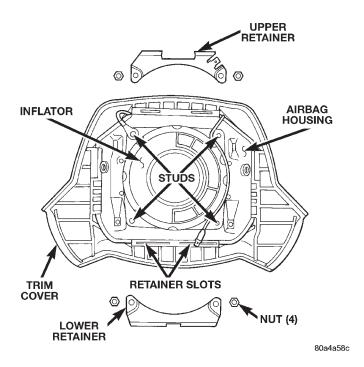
Driver Side Airbag Trim Cover Retainers Remove/Install - w/o Speed Control
